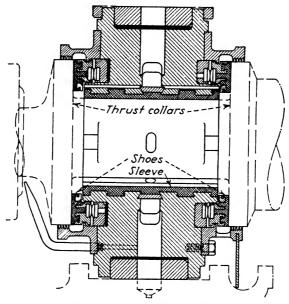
Combined sleeve and thrust-bearing assembly. (Courtesy of Allis-Chalmers Manufacturing Co.)
